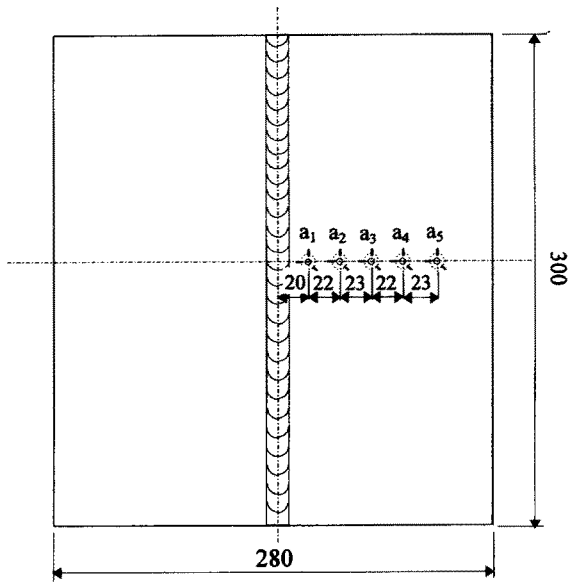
Dimensions of the first thin butt-welded specimen and locations of the strain gauge rosettes (units in mm) for the measurement of the originally locked-in residual stresses (thickness = 2 mm).
